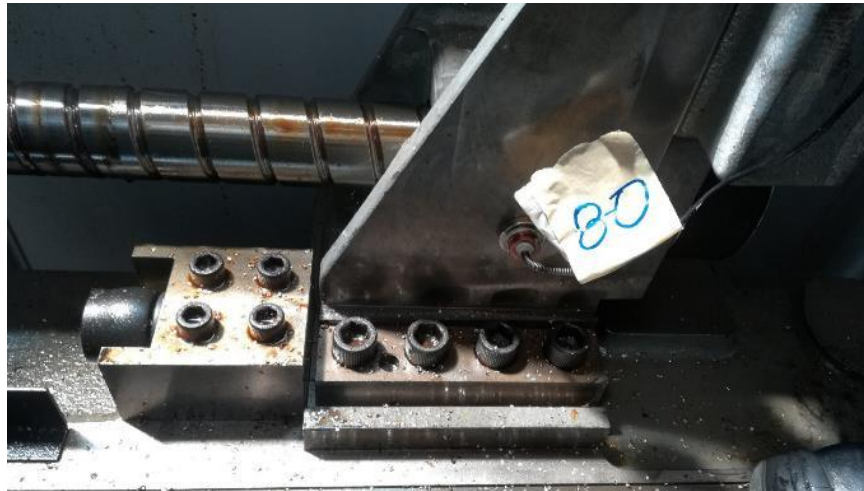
External temperature sensor placed on the static element (bearing house of the ball screw bearing).
